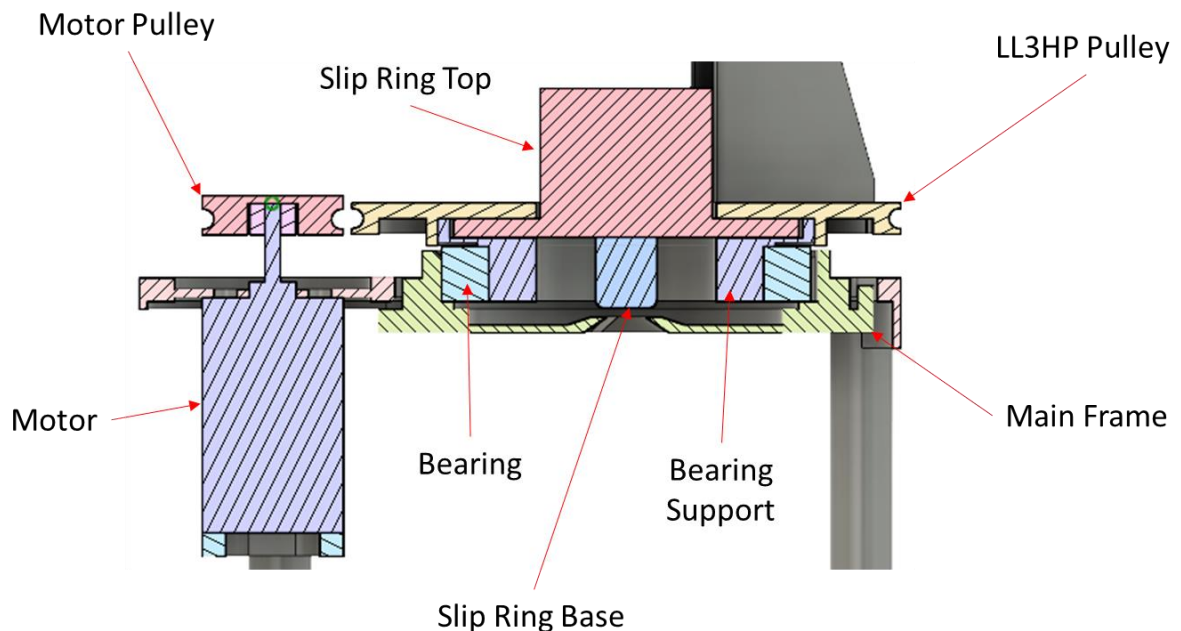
Cross-section of prototype rotation mechanism (O-ring removed for clarity)
